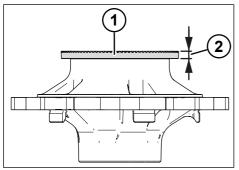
Checking the parallelism of the ABS magnet wheel
